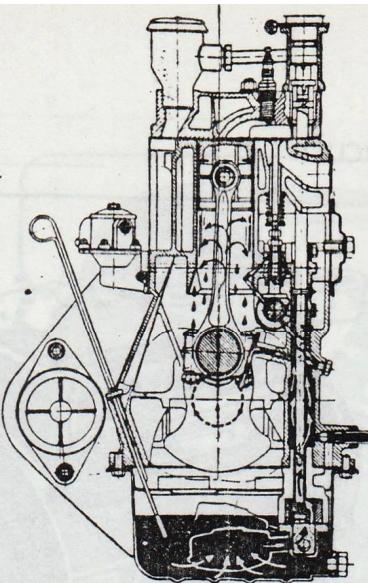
Cross-section of Mayflower engine showing lubrication system.
